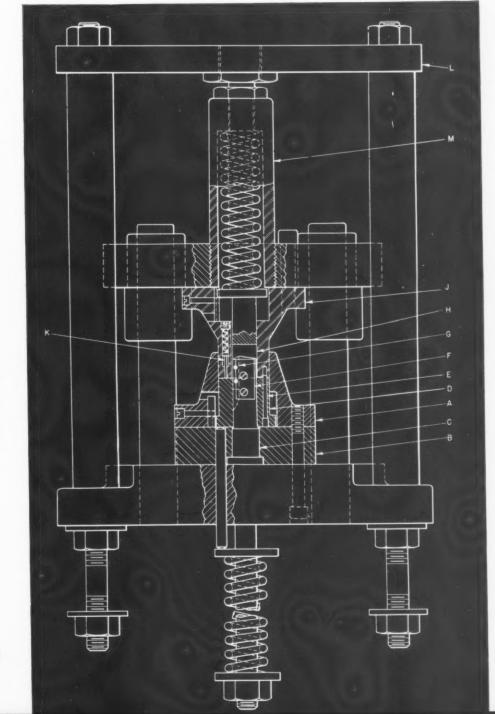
Assembled View of Punch and Die Used in Forming the Part Shown in Fig. 1
